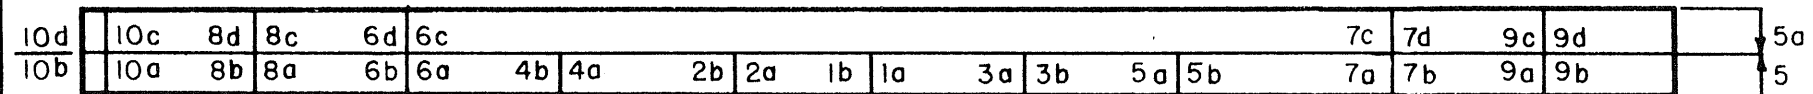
LOCATION OF STIFFENERS FOR WELDING SEQUENCE A
